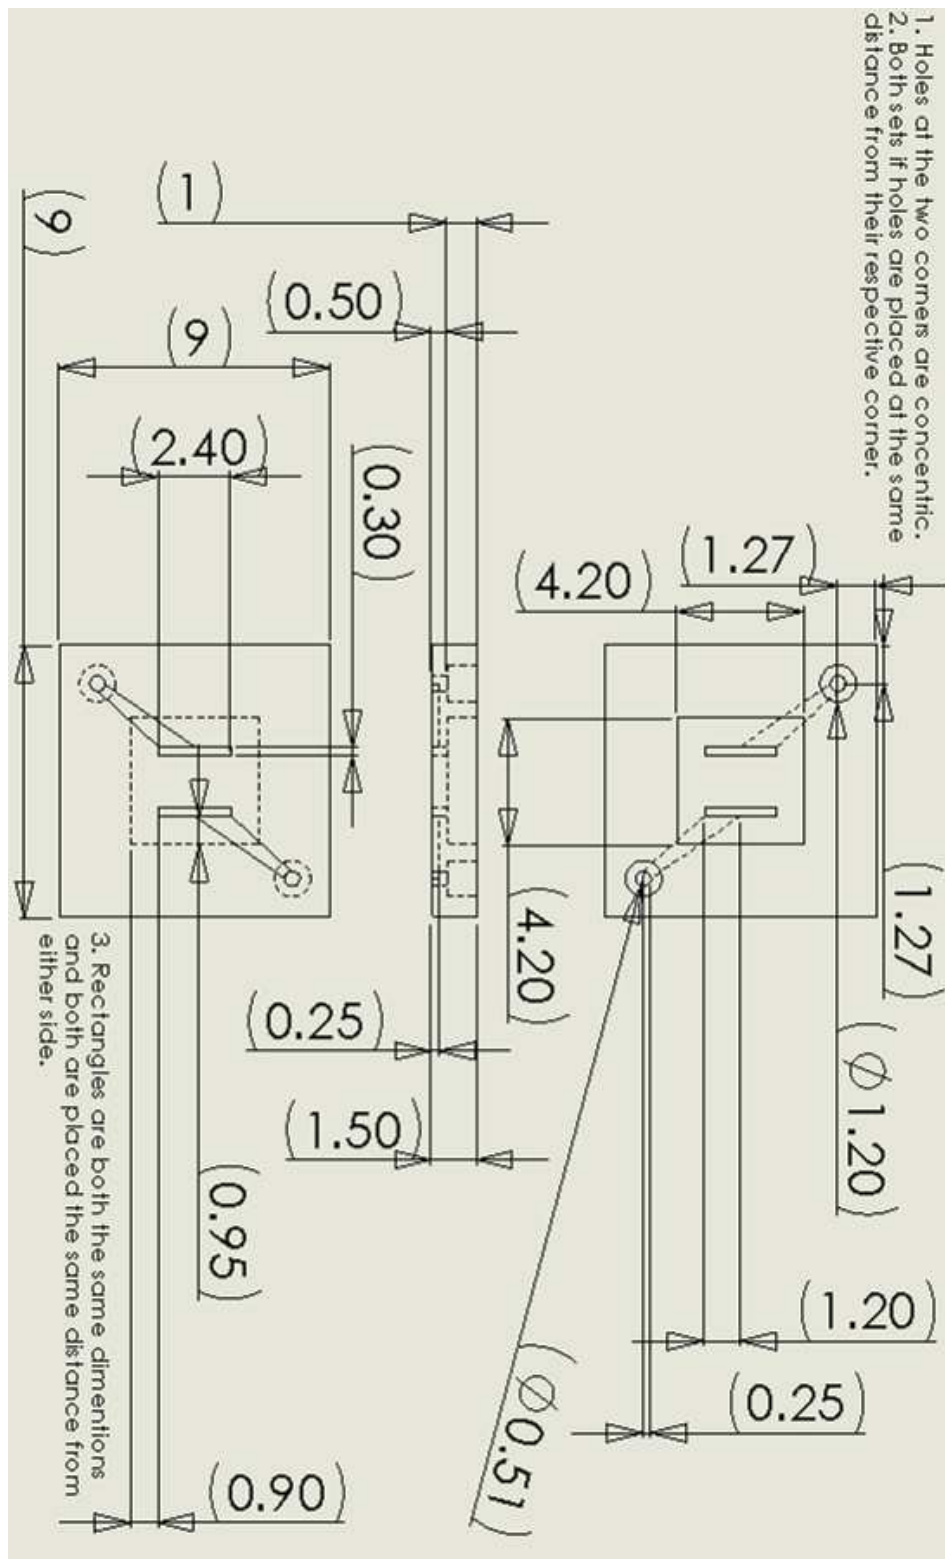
This is a drawing with dimensions of the top manifold used for packaging the spring-softening sensors for liquid operation. All units are in millimeters. This manifold is meant to have the chip glued into it (using epoxy) and is attached to a DIL package with epoxy.
